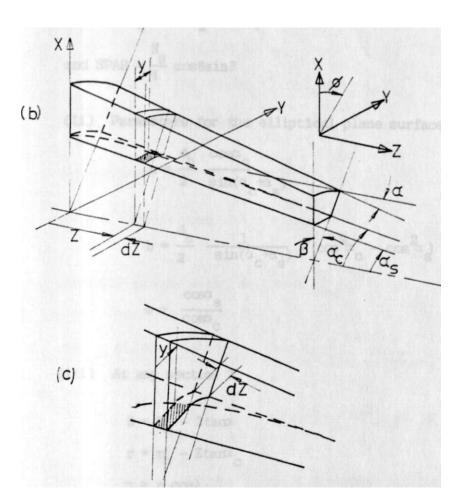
STRESS AND THE DEFORMATION PATTERN FOR THE DRAWING OF REGULAR POLYGONAL TUBE FROM ROUT® THROUGH A CYLINDRICAL DIE
